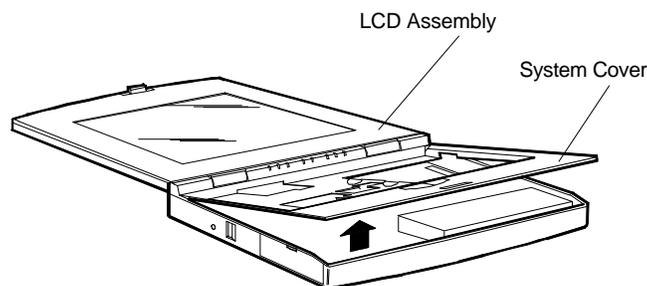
Removing the System Cover and LCD Assembly
